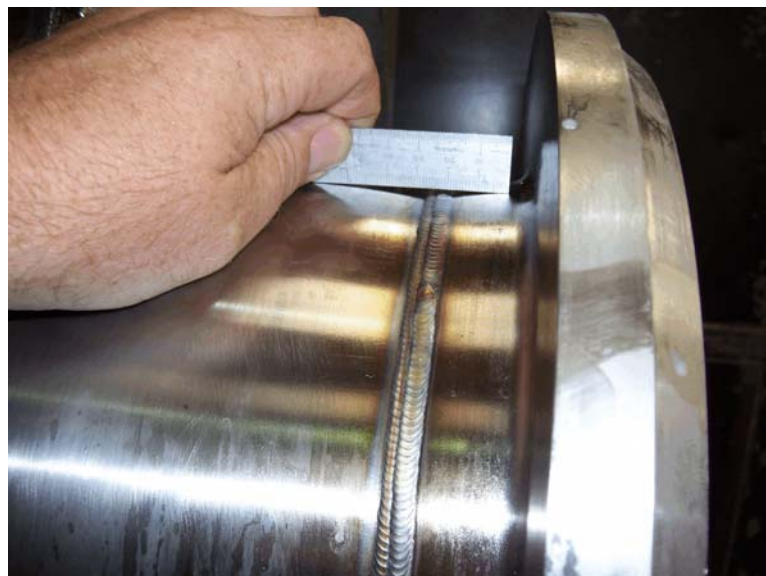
Cavity Assembly after welding showing hollow caused by weld distortion
